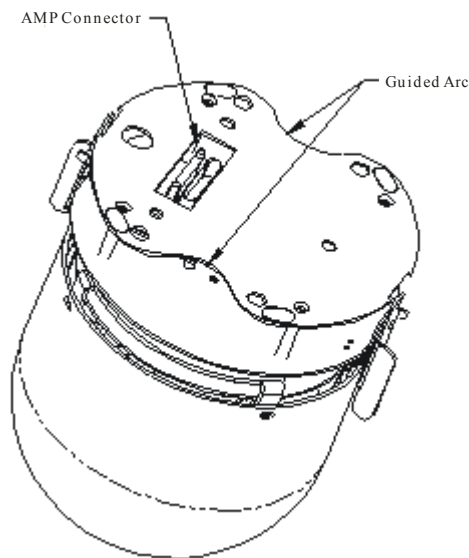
AMP Connector and Guided Arc on Dome Drive Bottom Board
